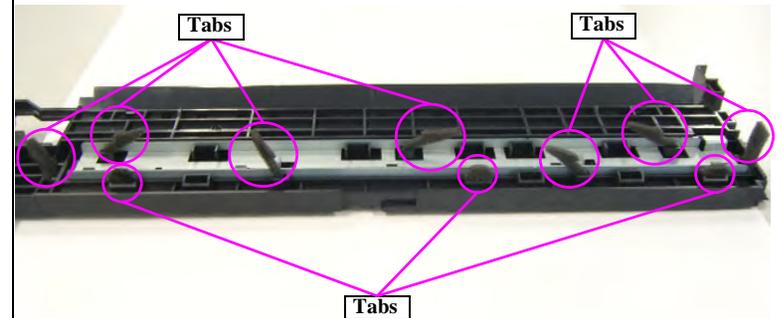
Reinstalling the Front Paper Guide Pad (1)
